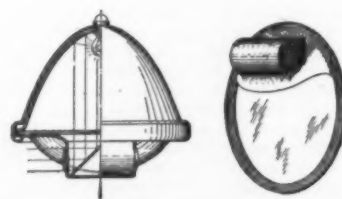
To combine sidelights and headlight and cut out glare, H. E. Lux has invented this device
